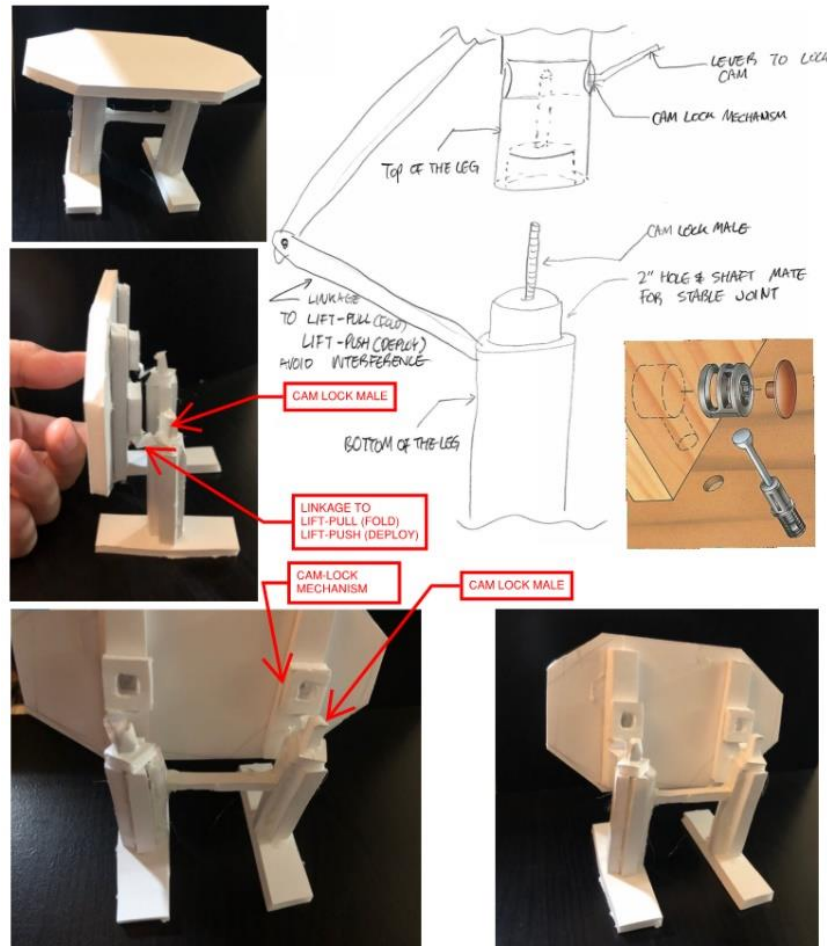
Hex Table Folding Cam-Lock Mechanism (Hinge Prototype)
